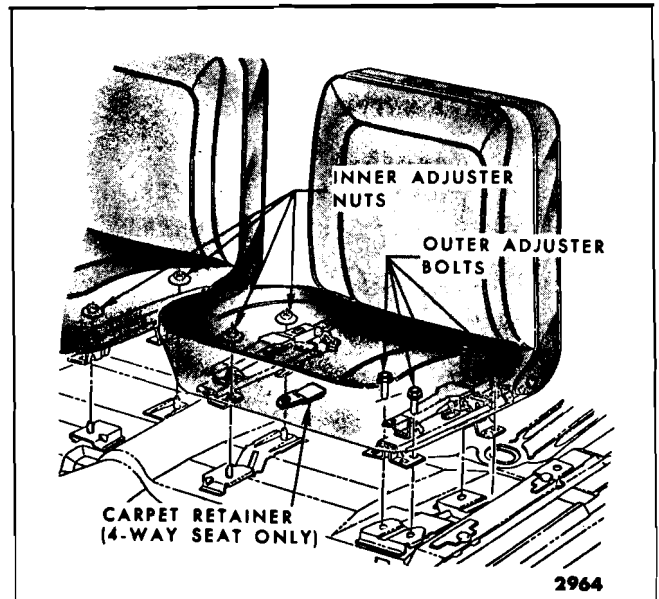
Bucket Seat Floor Pan Attachment - "B, C & E" Styles - Bucket Seats
